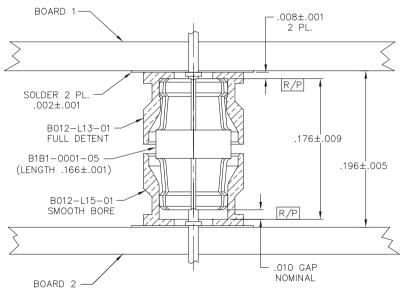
GPPO Minimum Board-to-Board Tolerance Analysis
